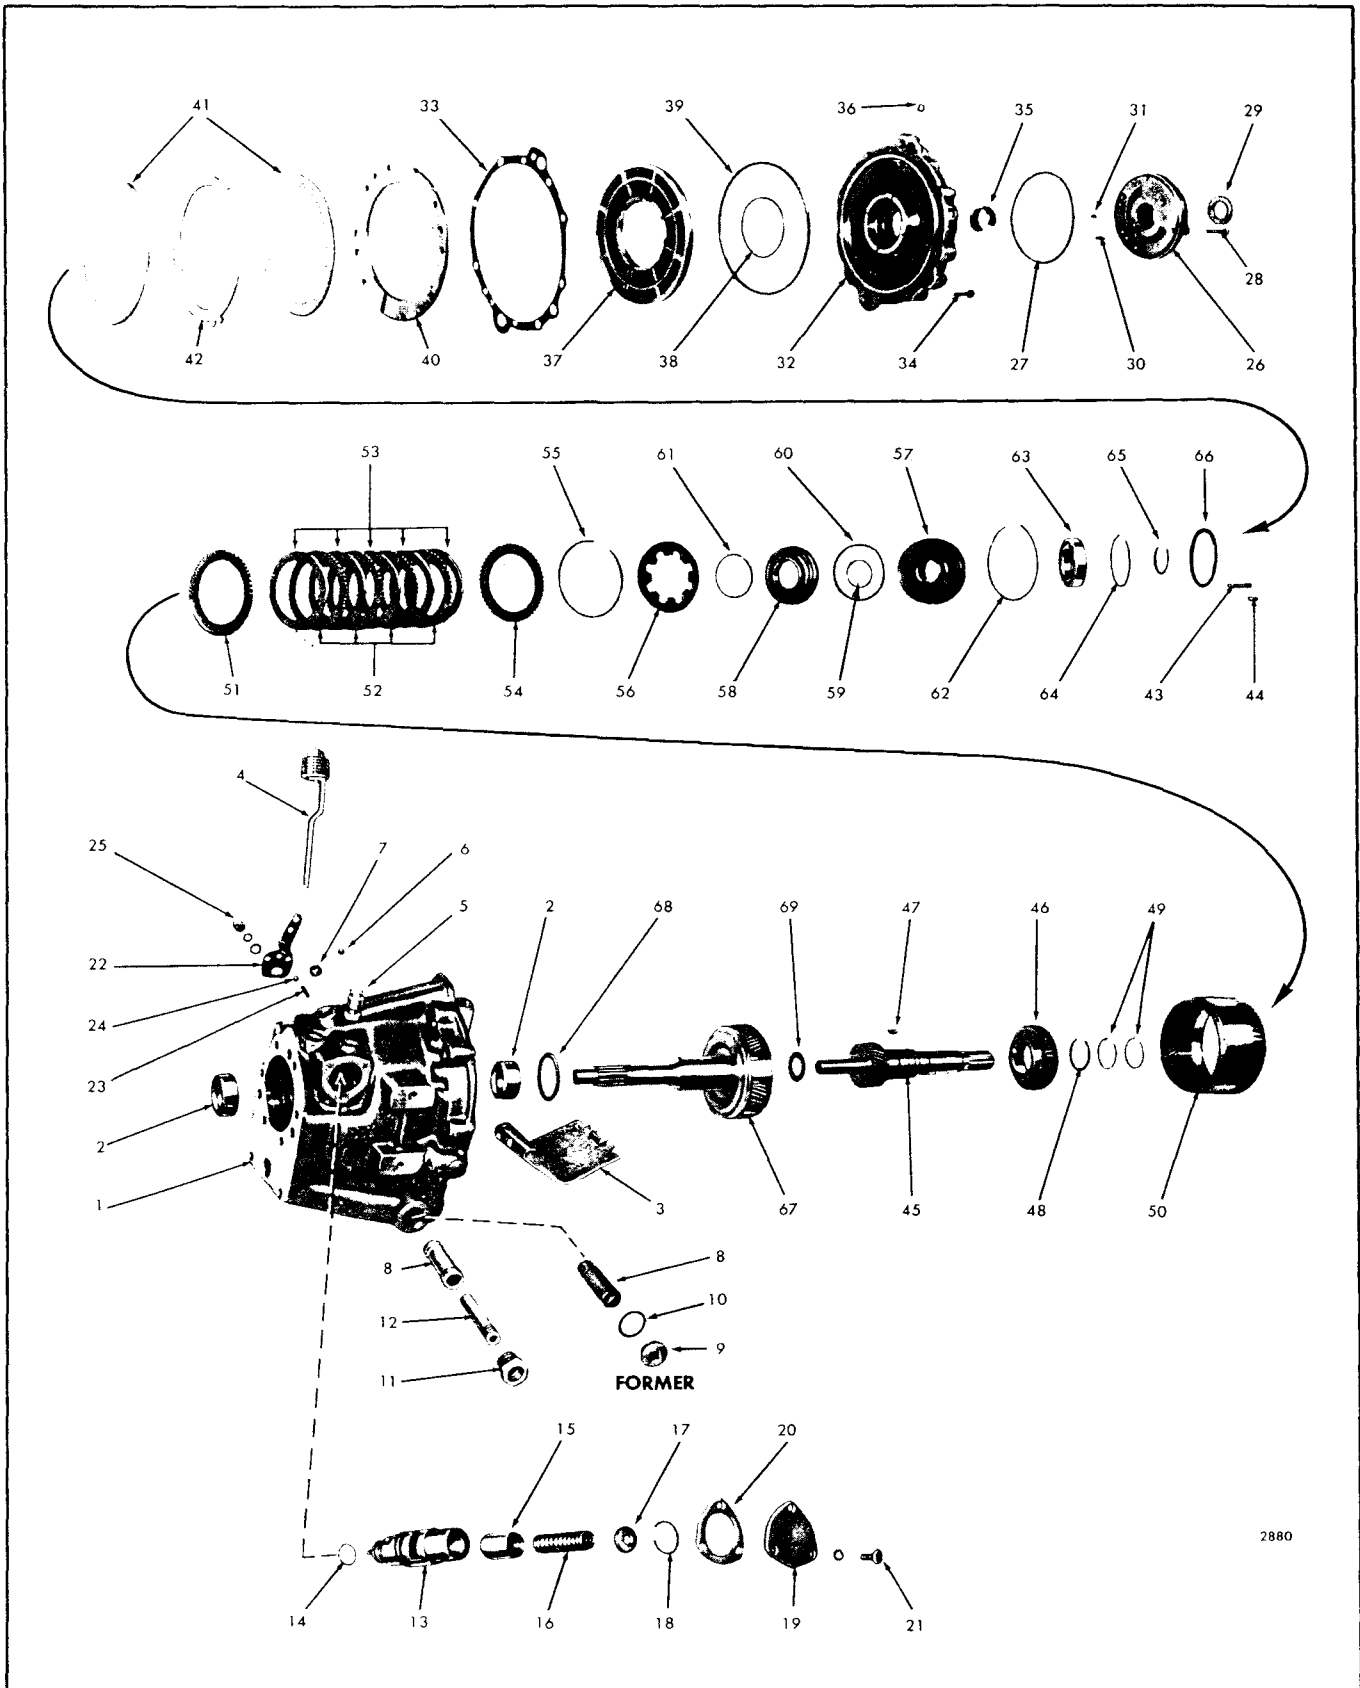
Reverse Gear Details and Relative Location of Parts (2.1:1 Ratio Model 71C Shown)
